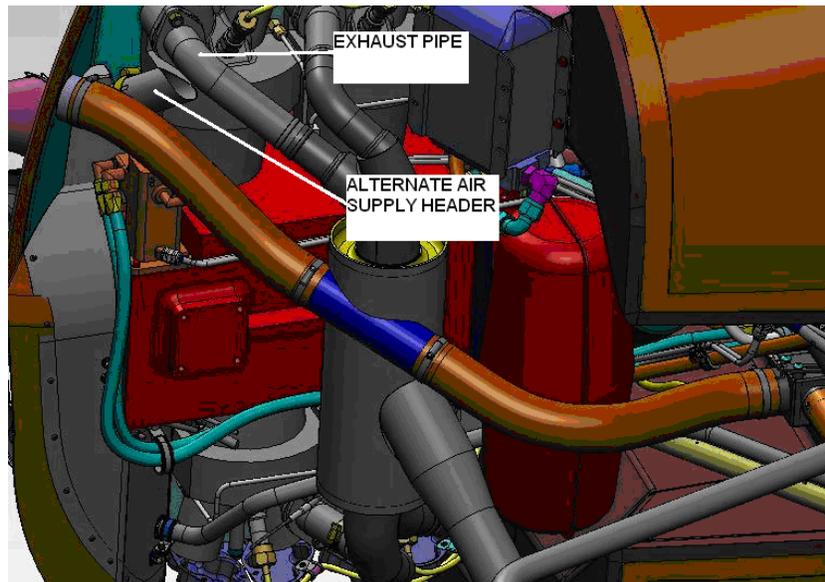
Exhaust Pipe to Alternate Air Supply Header
